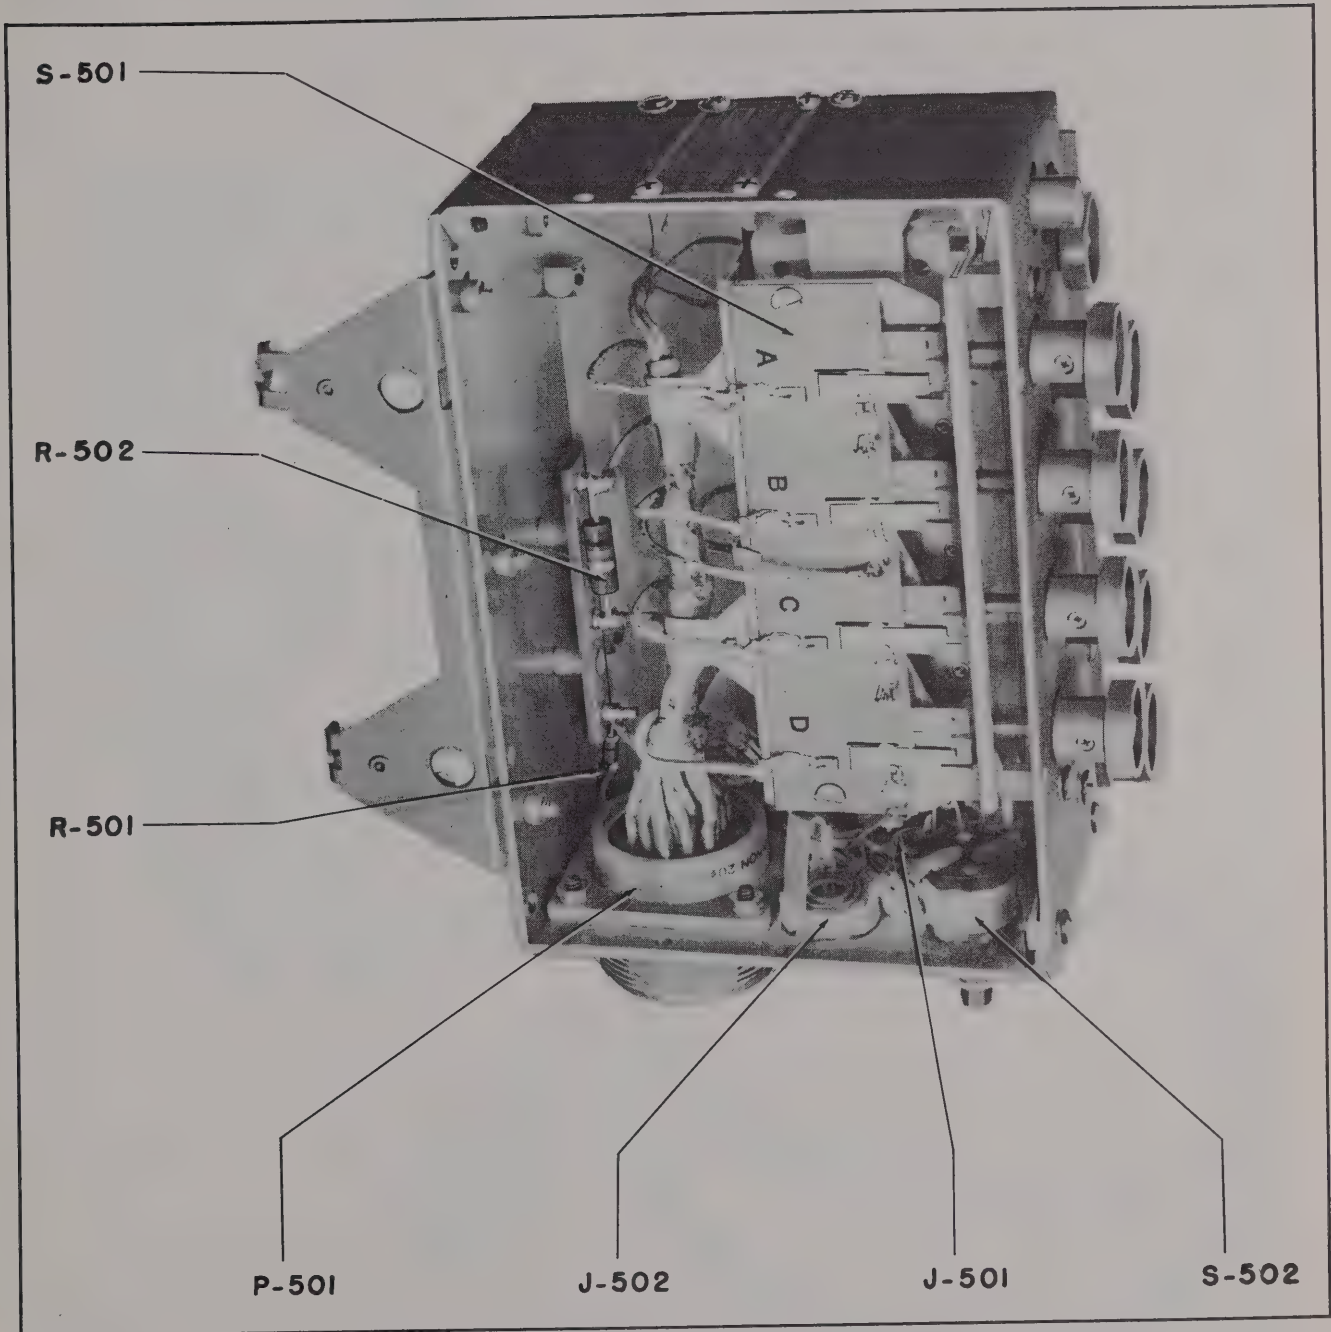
Control Box C-118/ARC-3 — with Side Cover Removed
